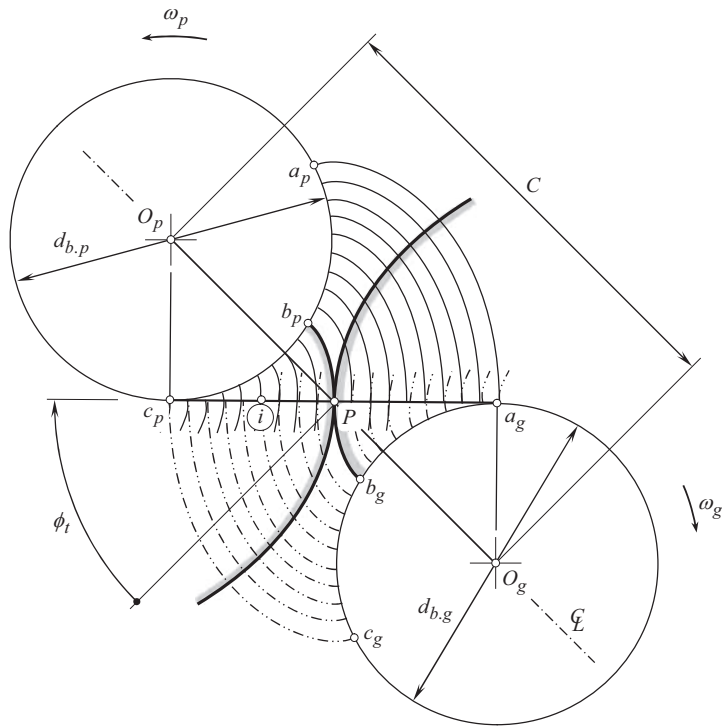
Interaction of involute profiles in transverse section of parallel-axes gearing.
